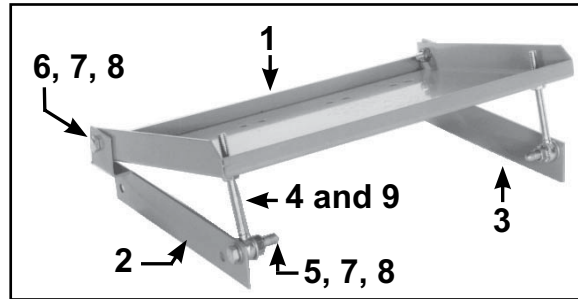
Motor Base Assembly for Cabinets A and B (Refer to Table 17)
